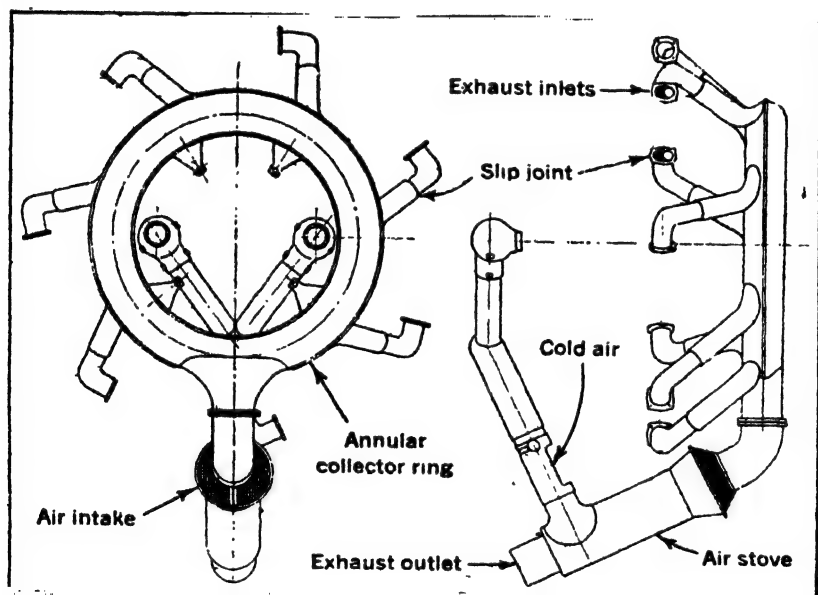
Drawing of Complete Exhaust Manifold System of 100 Horsepower Seven-Cylinder Siemens Engines. Note the Heater Stove and the Connection to the Carburetor Fitted with a Cold Air Bypass.
